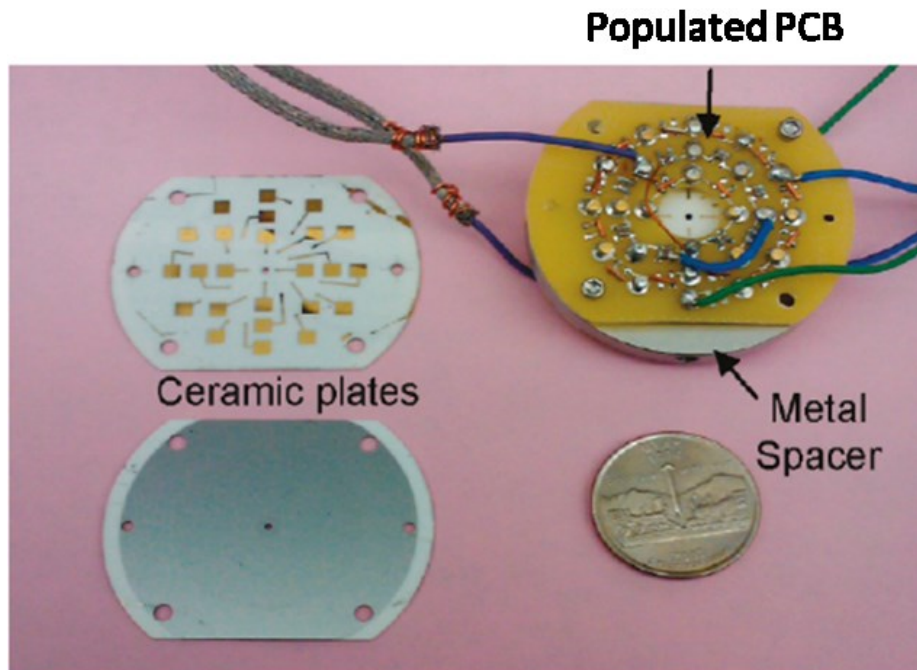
Back side metal patterning on ceramic, germanium covering the trapping side, and a populated PCB forming the plate/PCB assembly.
